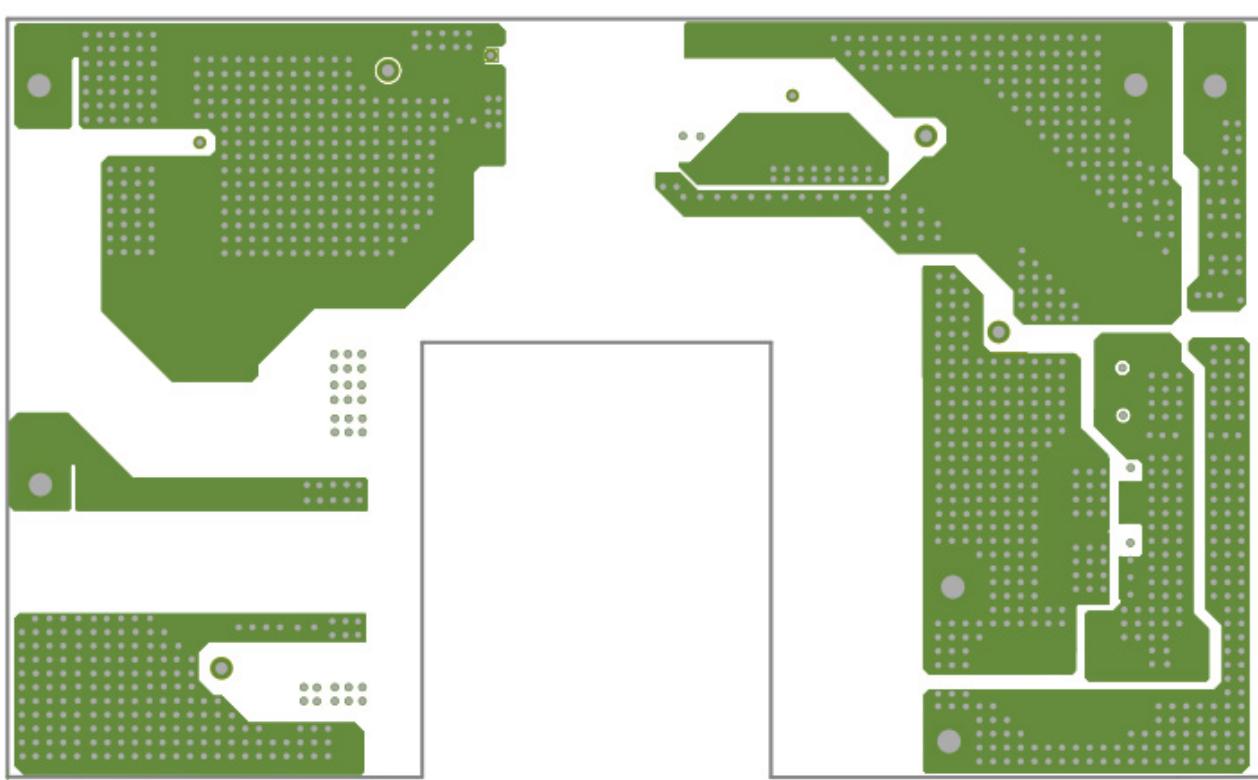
Printed Circuit Board Layout (Internal Layer 2).
